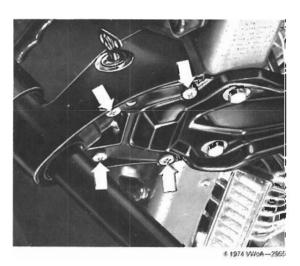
Phillips head screws (arrows) and bolts that hold the lock housing.
